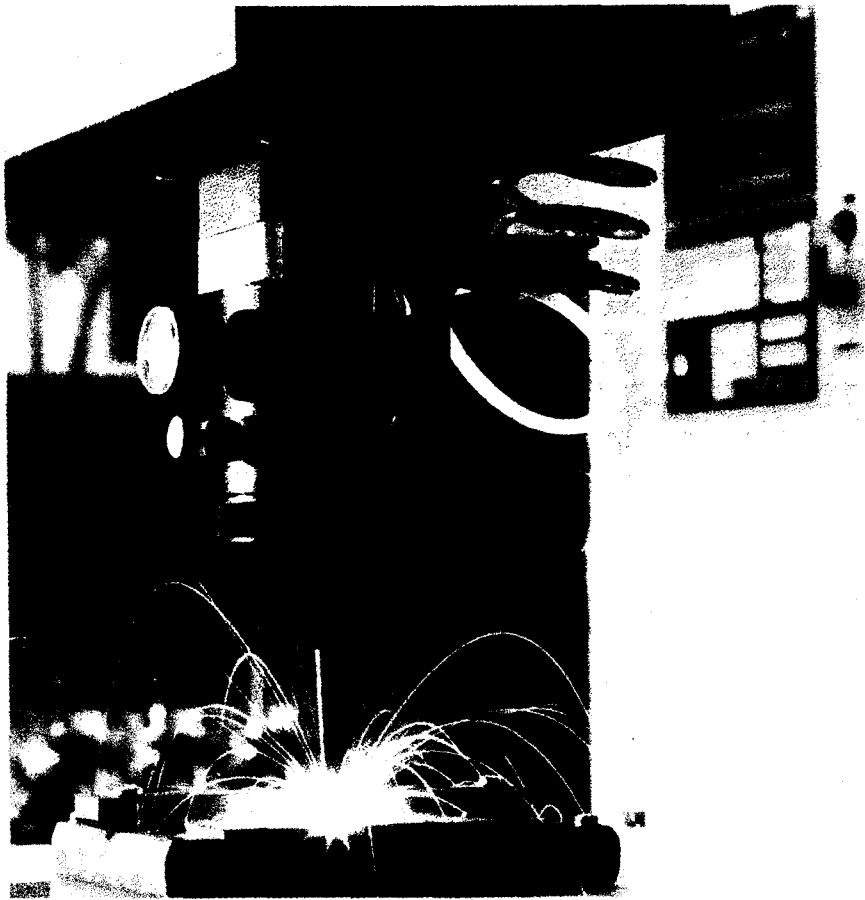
Laser Weld Being Made on 1/8 in. (3.2 mm) Thick Type 304 Stainless Steel
